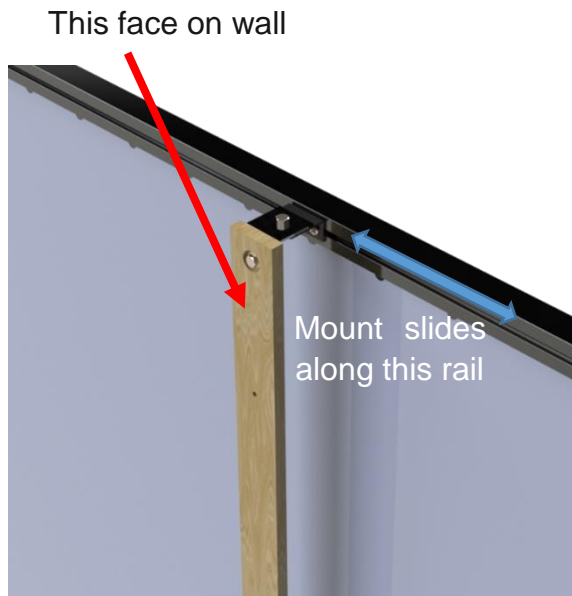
Render of WSDQ and wallboard mount showing wood of wallboard and sliding ability. Note: screws can be used to mount on any part of wallboard mount.
